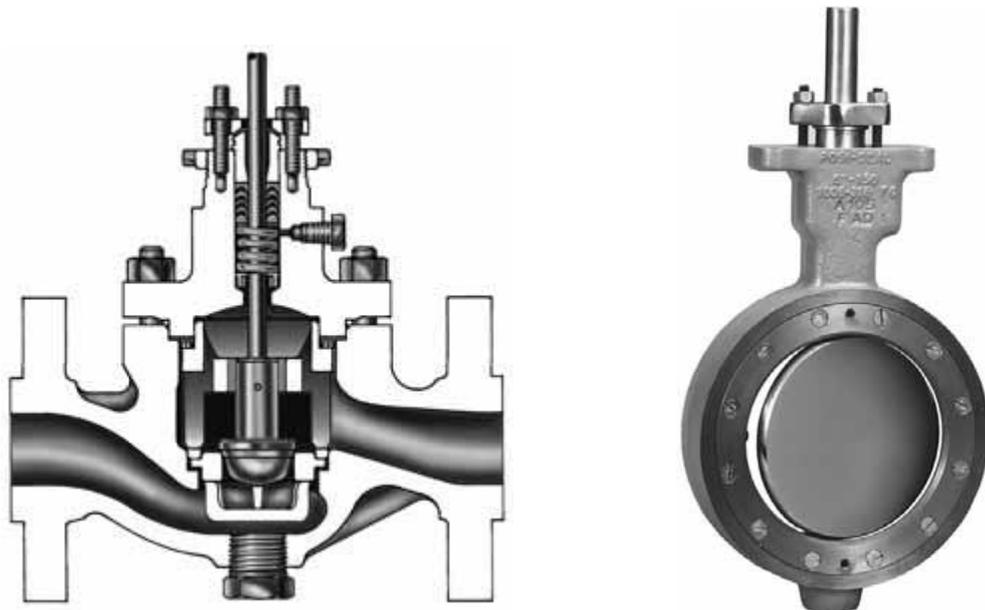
A single-ported globe valve and a rotary butterfly valve (Emerson Process Management, 2005, 42 & 45).
